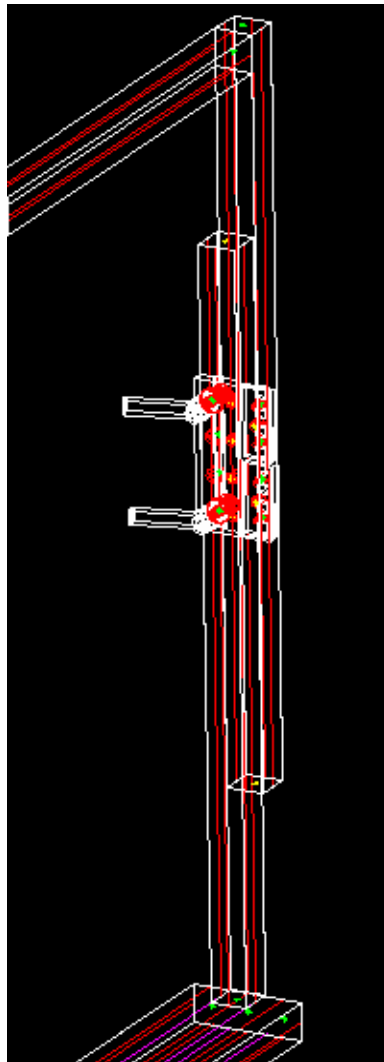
View of Gas Spring Representation and Linear Motion Mechanism
